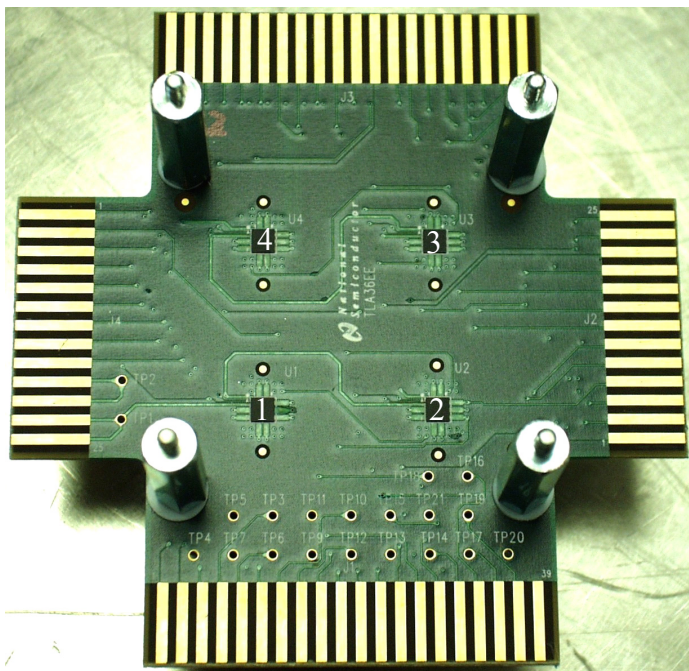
Photograph of the electromigration test board (8.9 mm x 8.9 mm) showing four mounted test chips.
